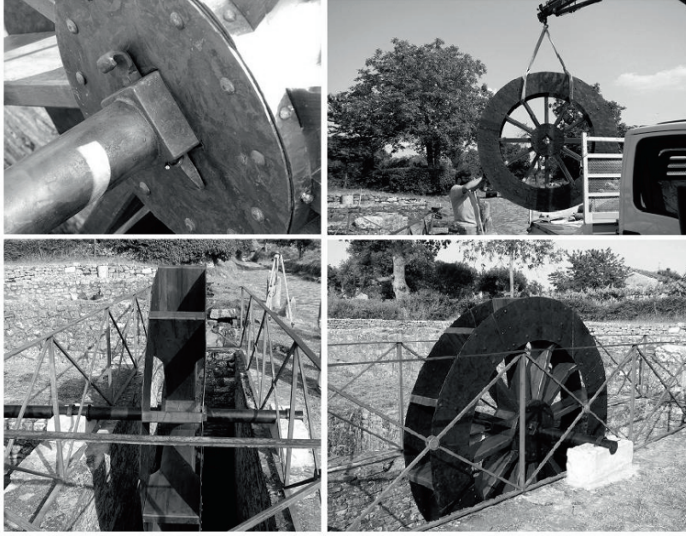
Details of shaft, hub and blades assembly of the rotor.
